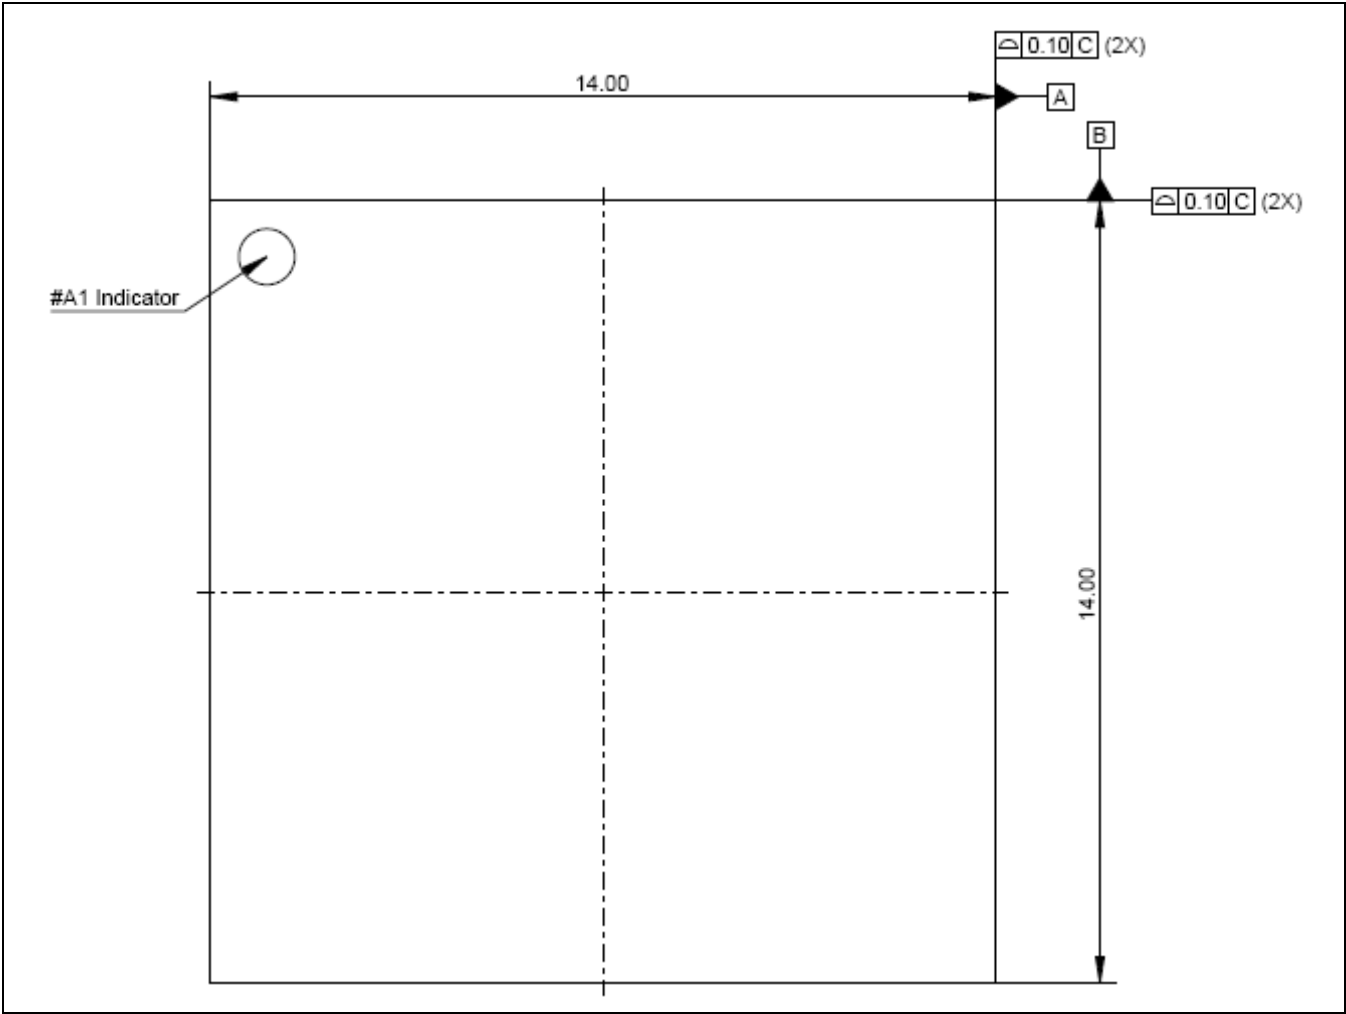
1 S5PC100 Package Dimension (521-FCFBGA) – Top View
